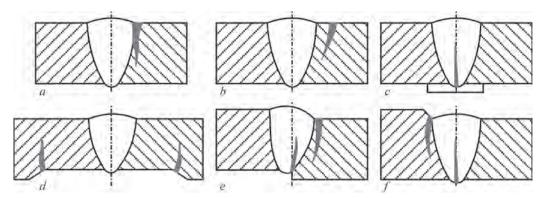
Typical damages of welded joints of steam pipelines: a — creep crack in the region of HAZ fusion; b — creep crack in the region of partial HAZ recrystallization; c — fatigue crack at the weld root near the backing ring; d — fatigue crack in the places of contact of pipe elements of different thicknesses; e — fatigue crack at displacement of steam pipeline pipes welded abutt; f — fatigue crack in welded joints of different thicknesses
